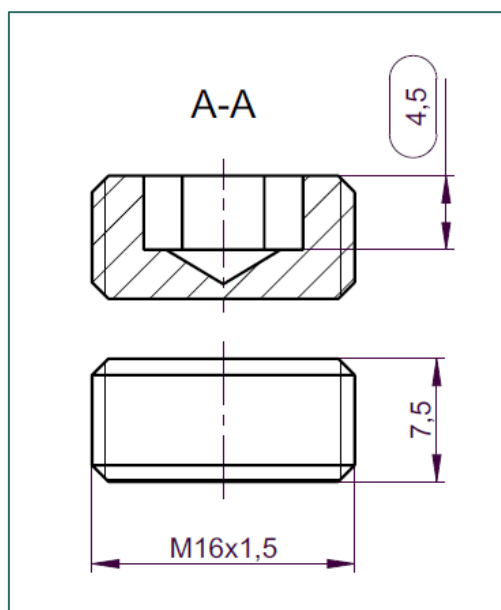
DIMENSIONS OF THE MUTARS® SAFETY SCREW
